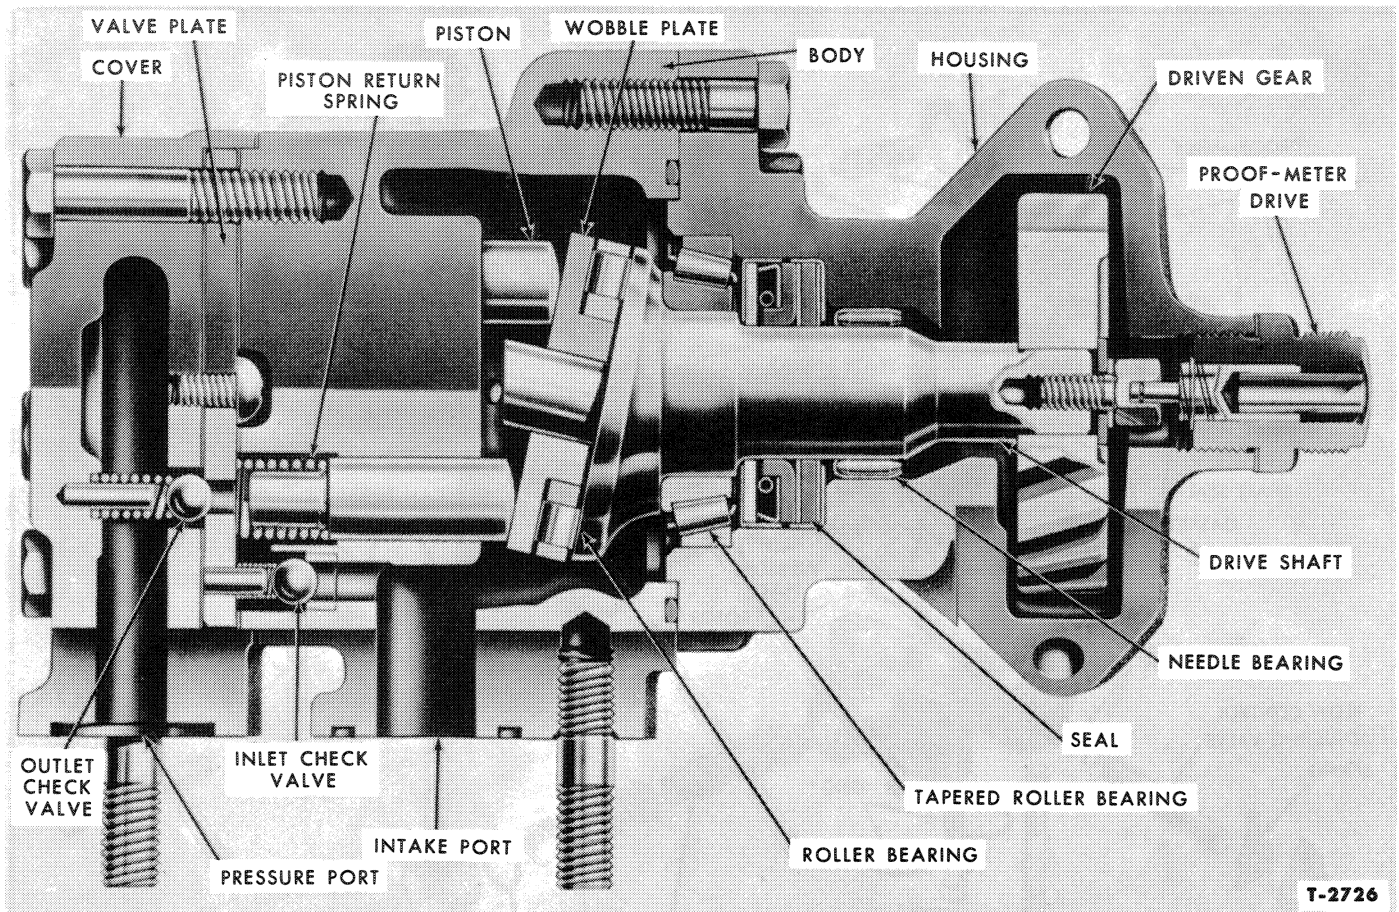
Tapered Roller Bearing Piston Type Hydraulic Pump—Sectional View
